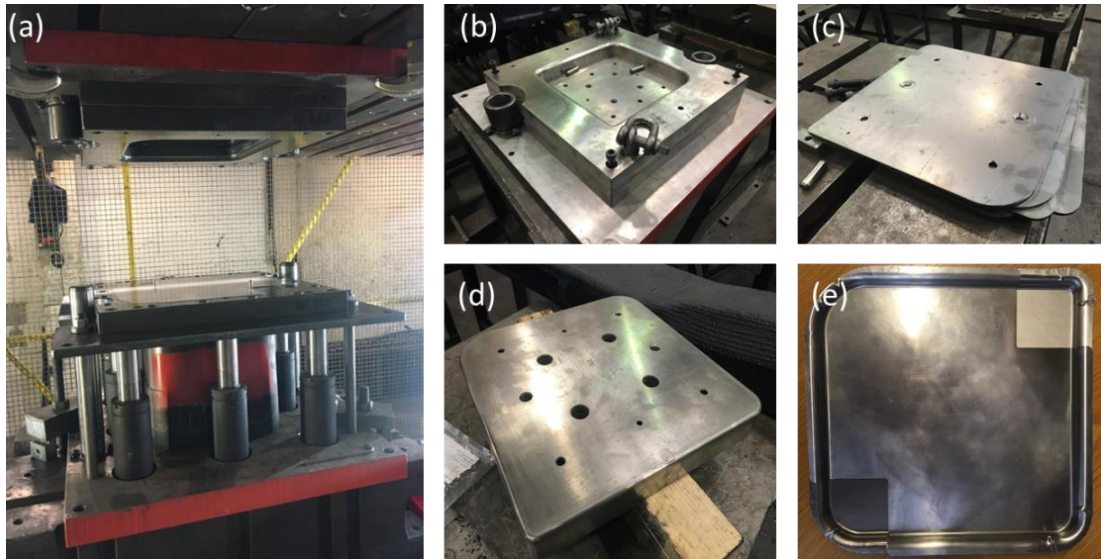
Illustration of tool set up for drawing without a blank holder.
